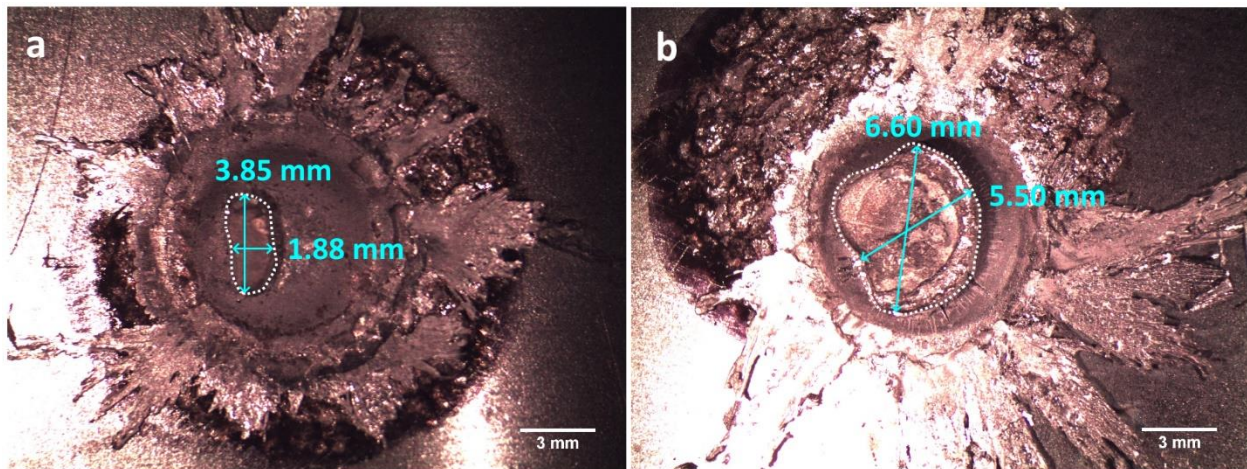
Peel test nugget sizes for samples welded with AZ81A interlayer at a) 13 kA, b) 14 kA
